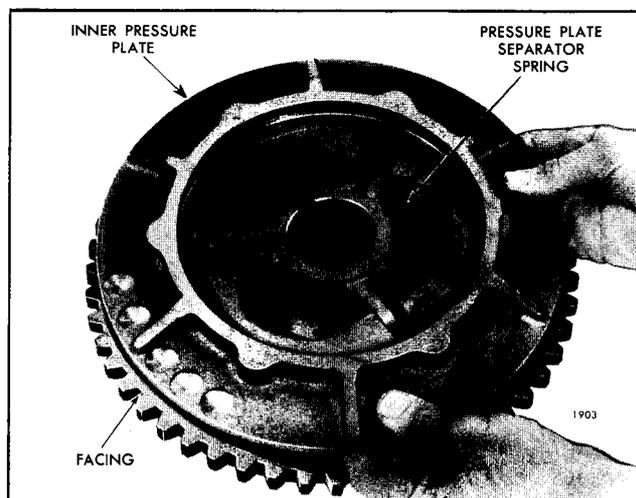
Installing Inner Pressure Plate With Springs and Clutch Facing in Plate
